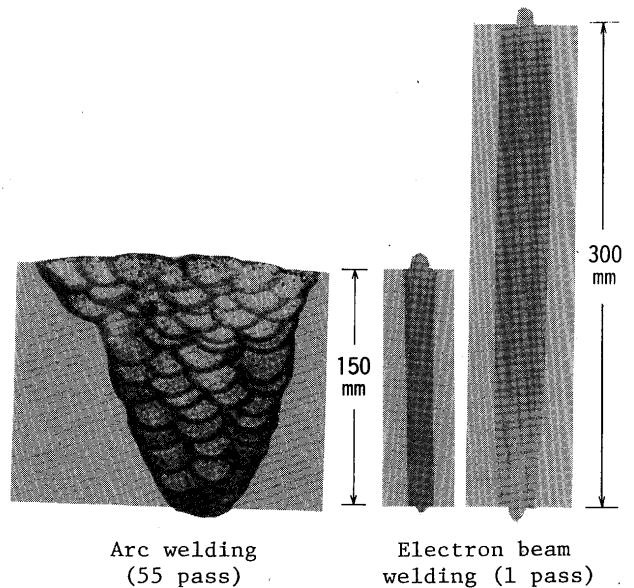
Comparison of bead cross sections between conventional welding and electron beam welding.
